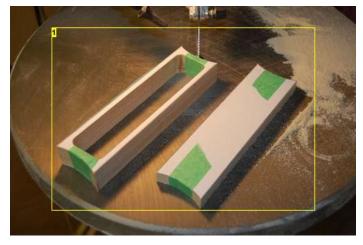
Cut, but not yet sanded. They'll be sanded flush after gluing.
